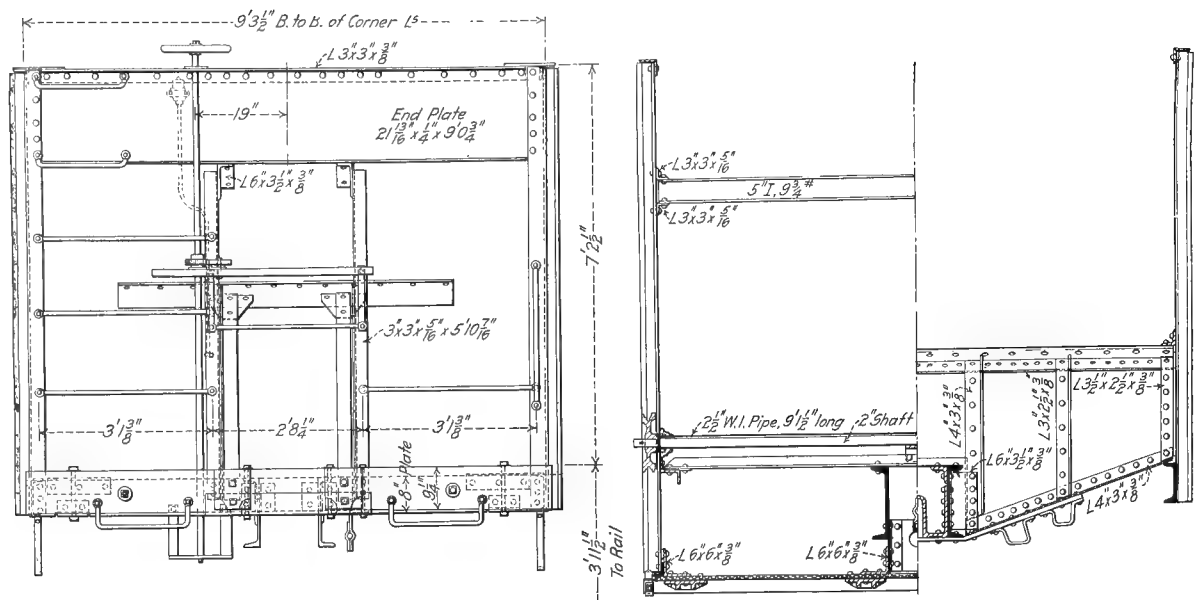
End Elevation and Cross Sections of Norfolk & Western All-Steel Hopper Car Shown in Figs. 22 and 292.
